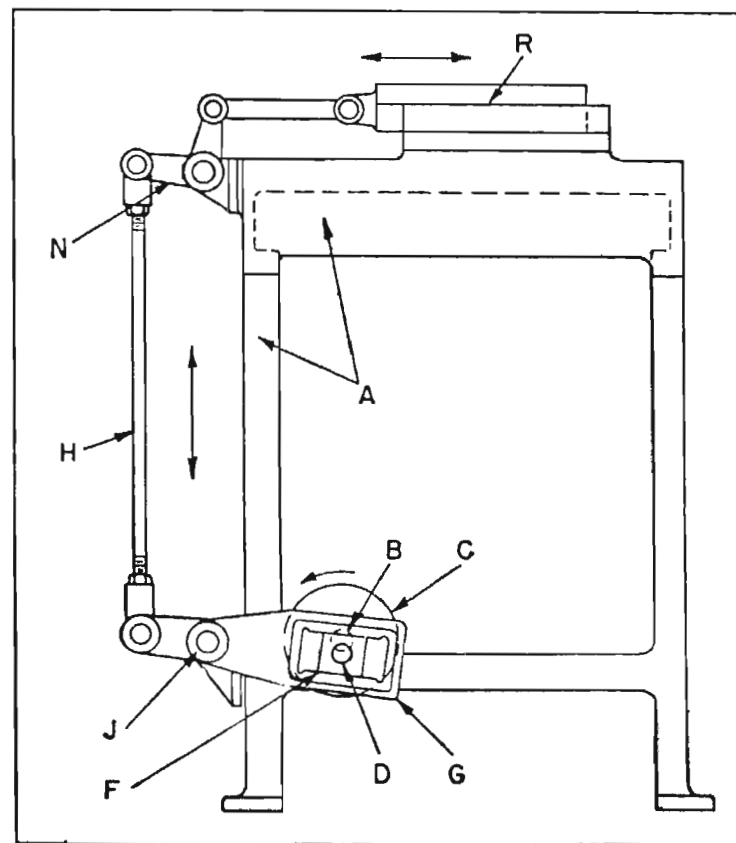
Sliding Block *F* Mounted on Eccentric Stud *D* is Employed with Connecting Linkage to Reciprocate Member *R* on Table of Machine.
